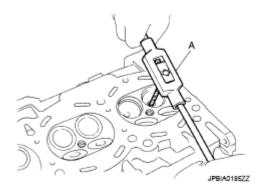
Reaming Cylinder Head Valve Guide (EXH) Hole Courtesy of NISSAN MOTOR CO., U.S.A.
